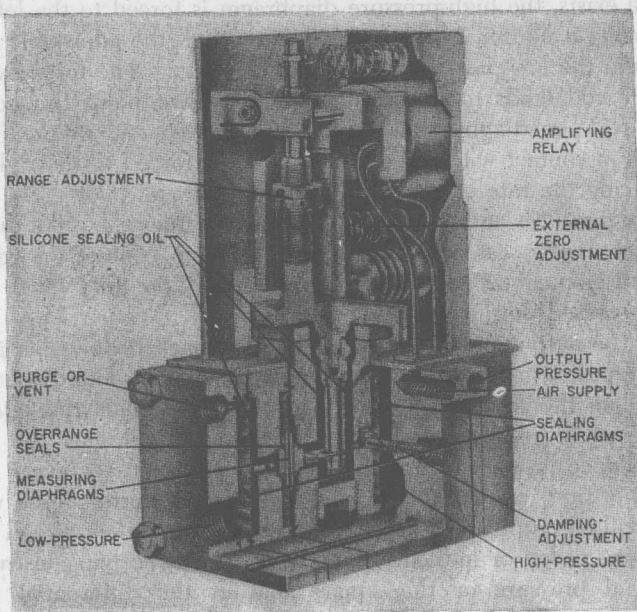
Cutaway view of differential pressure transmitter, pneumatic type. (Fischer and Porter Company.)
